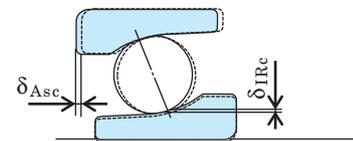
1c Change of dimension due to centrifugal expansion of inner ring raceway
